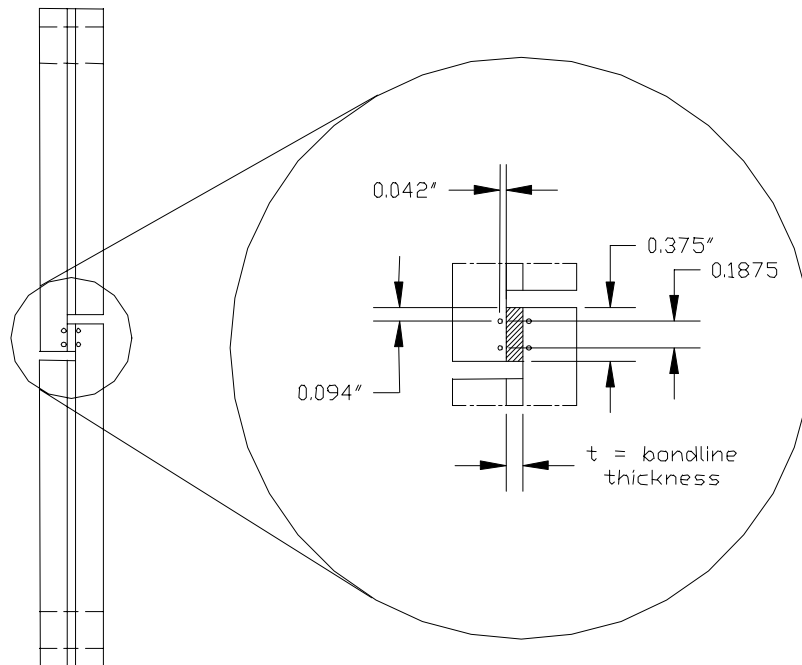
LOCATION OF THE MOUNTING HOLES ON THE ASTM D 5656 SPECIMEN
